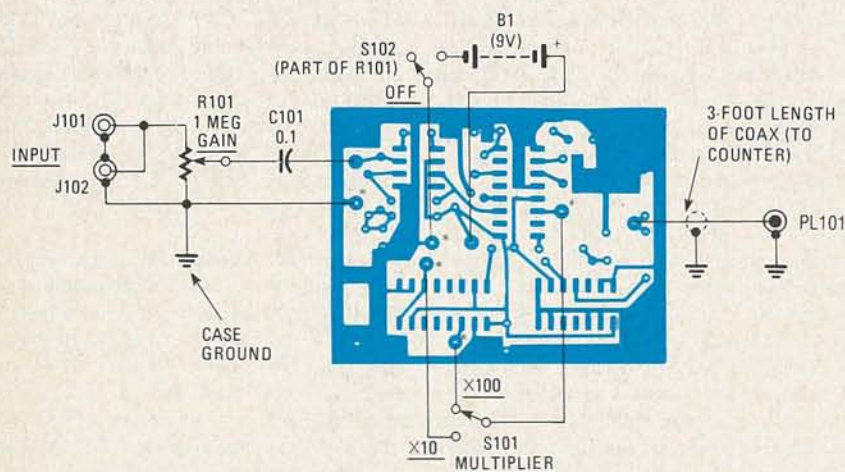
CONNECTIONS TO CASE-MOUNTED parts. Shield of coax used for output is tack-soldered to ground foil on bottom of board.
